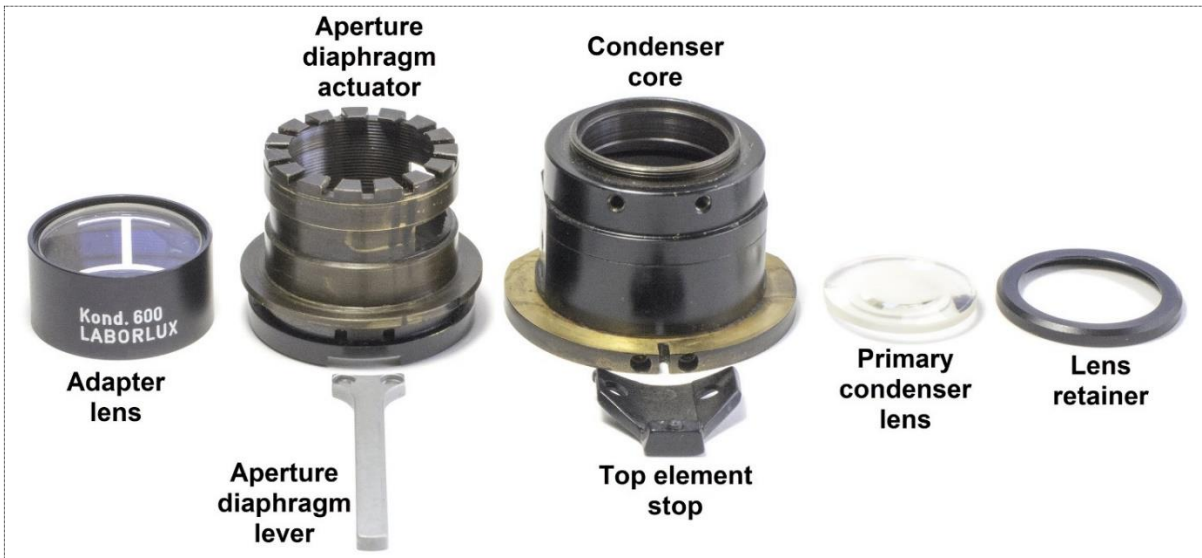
Exploded view of the parts of the condenser core (screws and the aperture diaphragm blades are omitted in the image.)
